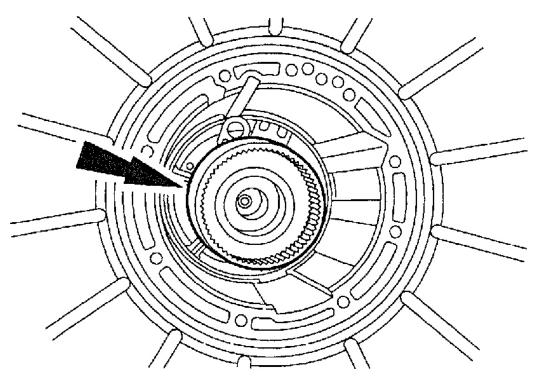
Removing Overdrive Planet Thrust Bearing
